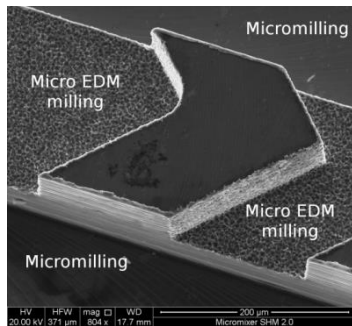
Image of a tool segment for microinjection moulding of SHM micromixer
